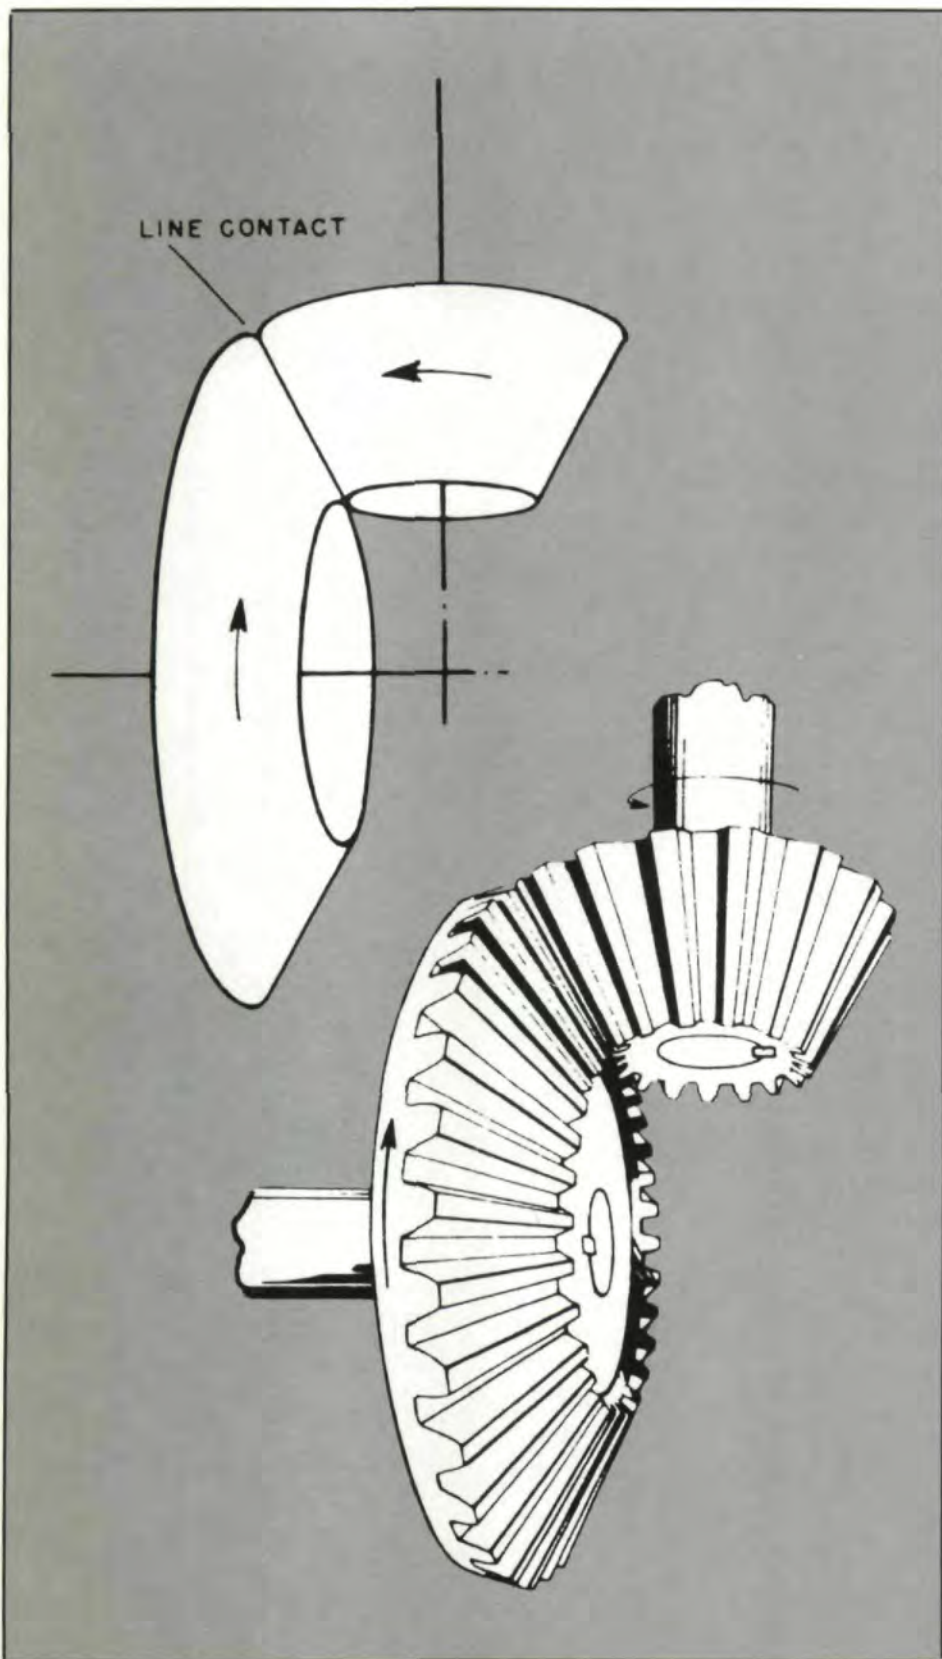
(Left) – Bevel gears. These shafts intersect at a right angle, although bevel gears may also be used between shafts that intersect at larger or smaller angles. (Courtesy Mobil Oil Corporation.)
